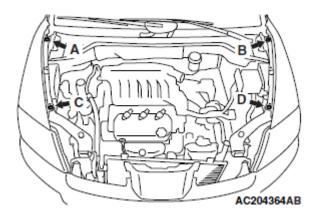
Front Fender Assembling Bolts A, B, C And D Courtesy of MITSUBISHI MOTOR SALES OF AMERICA.
